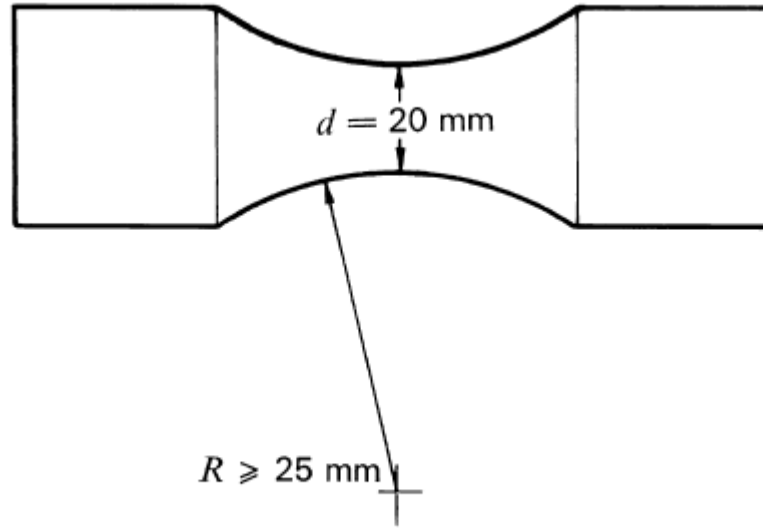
Test specimen dimensions for grey iron castings -
